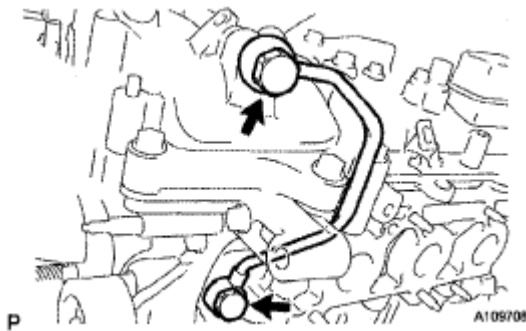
Locating Oil Pipe Unions And Oil Pipe No. 1
